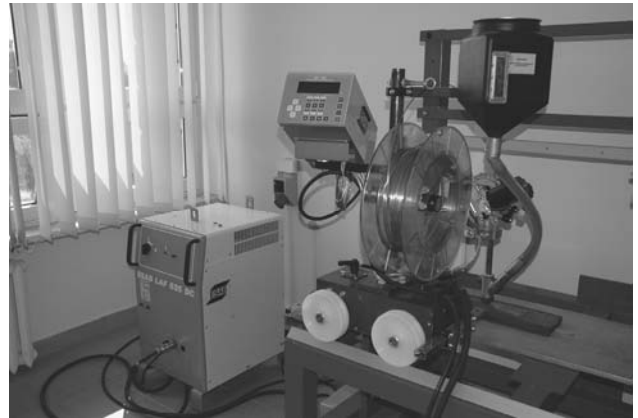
A view of SAW (Submerged Arc Welding) stand
